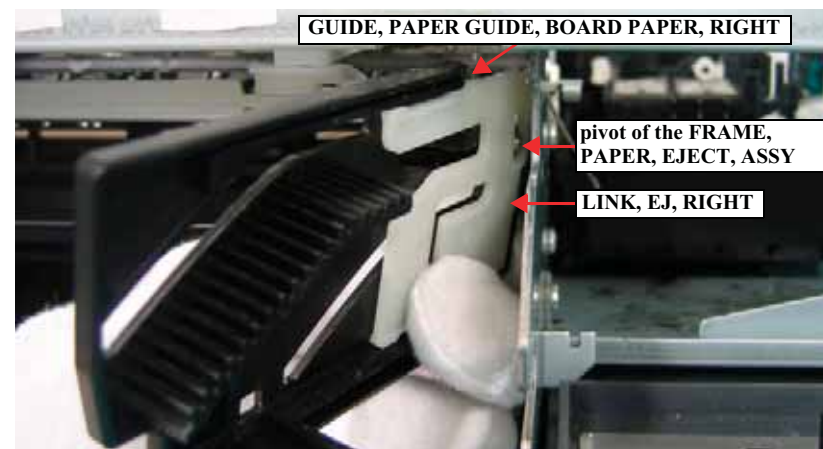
Removing the LINK, EJ, RIGHT and GUIDE, PAPER GUIDE, BOARD PAPER, RIGHT
